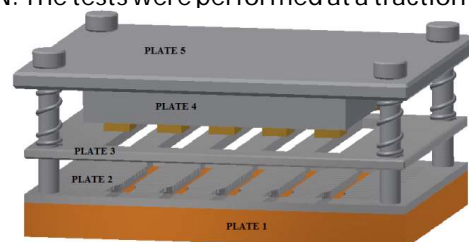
Mold for manufacturing test bodies according to ASTM D636 (I)
